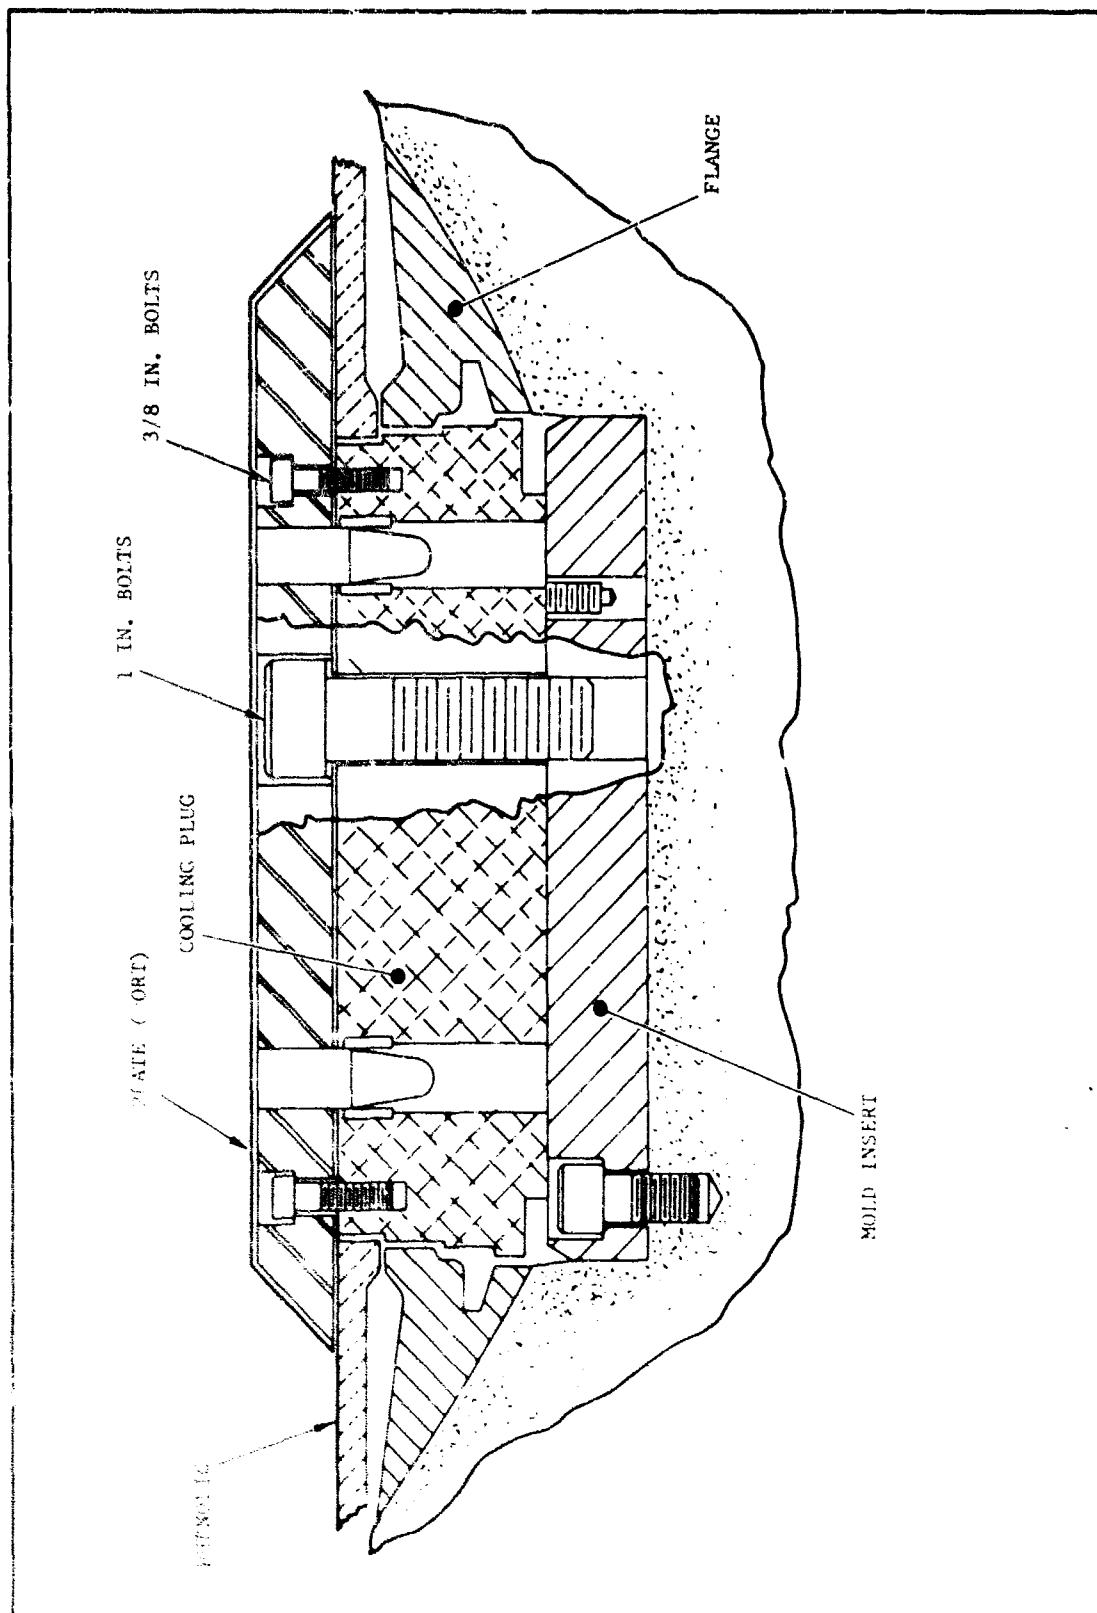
Aft-Dome Mold Nozzle Port Subassembly
